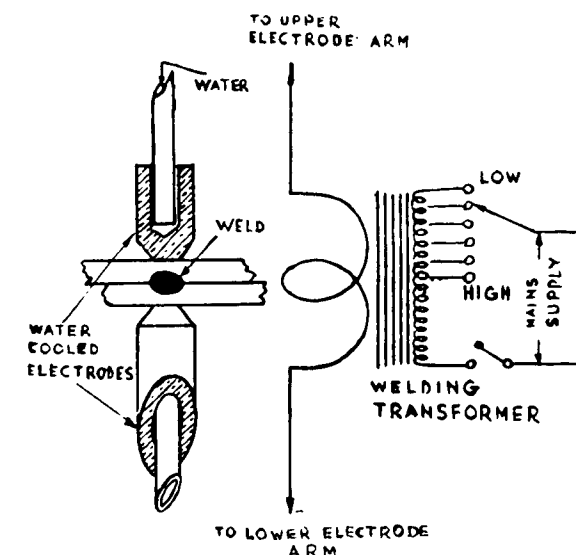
PRINCIPLES OF SPOT WELDING
